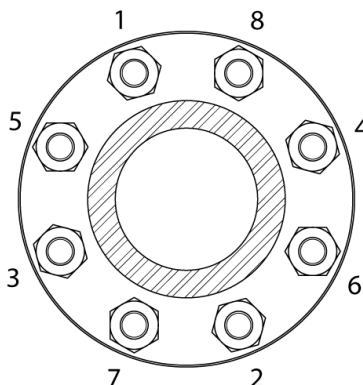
Bolt Tightening Sequence (8-Bolt Flanges)
